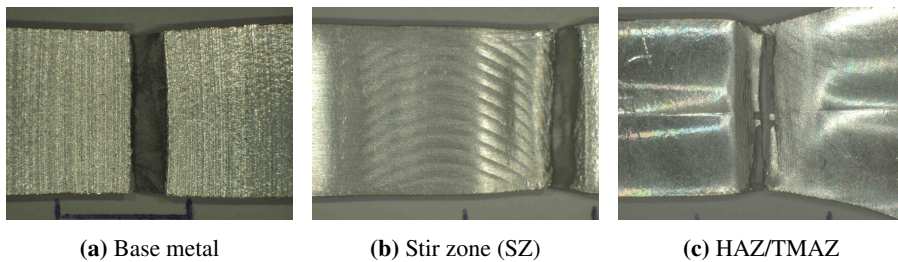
Macro images of the tensile specimens tested transverse to the welding/extrusion direction.
